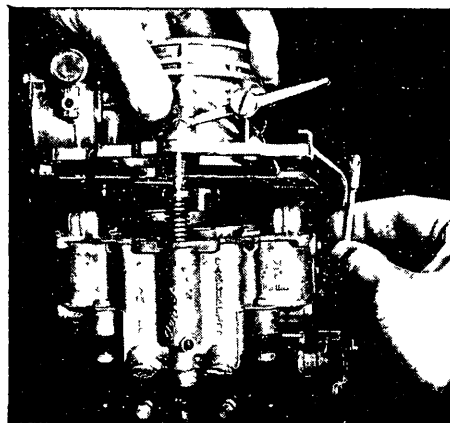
Remove gas line connection and strainer. Disconnect choke and pump rods. Remove pump fulcrum screw (left-hand thread), cover screws and air horn with flange attachment. Remove and scrap accelerating pump piston
